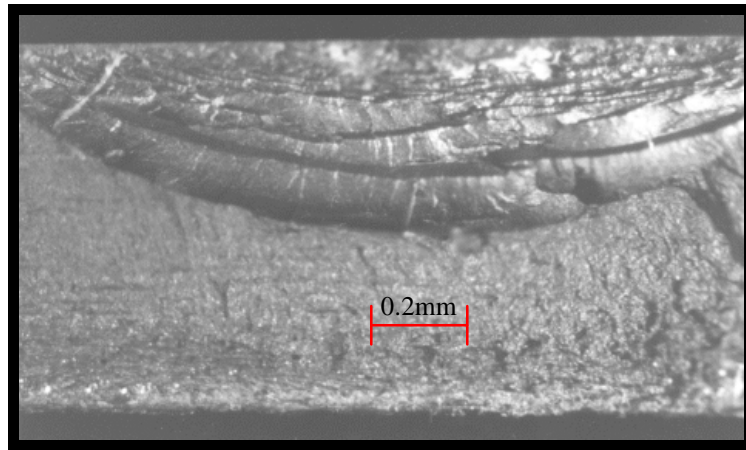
Fracture Surface of crack found in the closing ramp of lobe 3, camshaft V-13.
